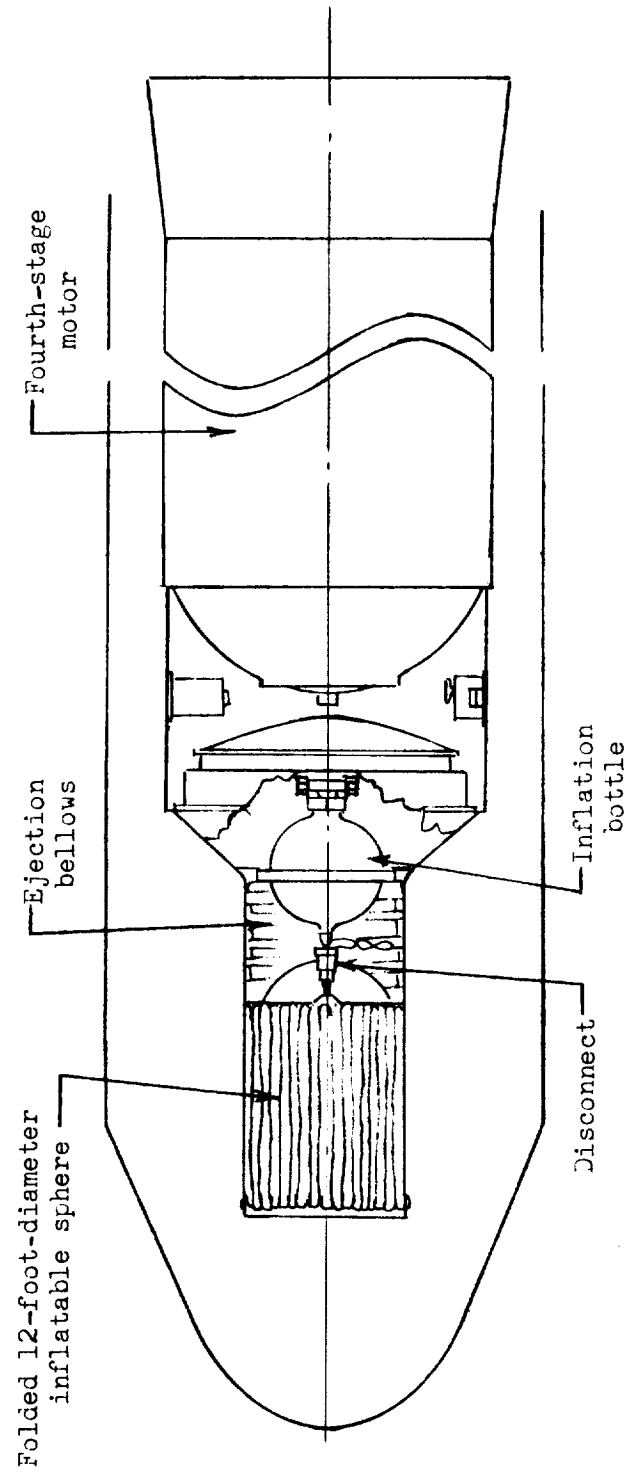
Fourth-stage motor and payload assembly of the Scout payload package.
